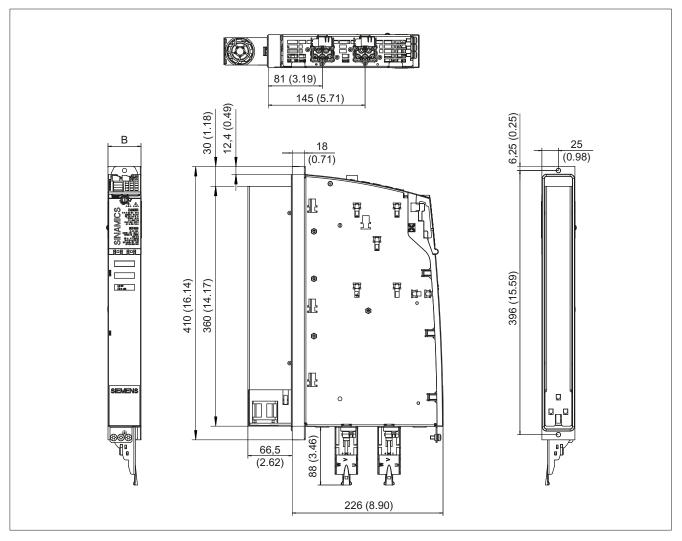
Dimension drawing of 3 A to 18 A and 2 x 3 A to 2 x 9 A Motor Modules Booksize with external air cooling, all dimensions in mm and (inches); example: 2 x 5 A Double Motor Module
